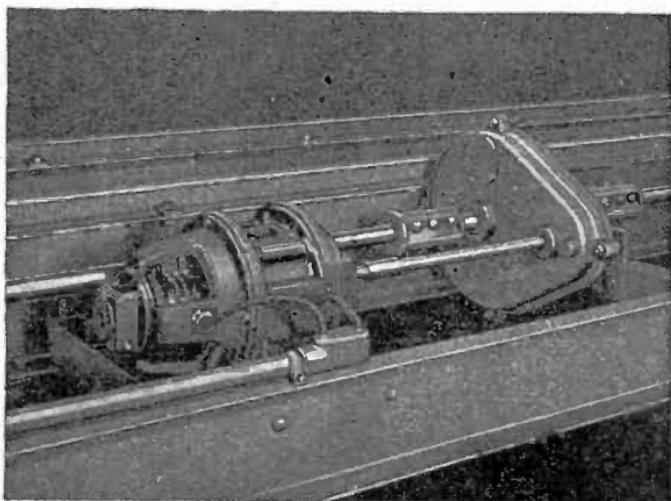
,887.—*Euclid crane construction 14.* Bridge drive mechanism used on I-beam girder cranes. A channel and plate structure, extending from one of the I-beam girders to the outrigger channel, forms a rigid and substantial support for the bridge drive motor. The driving pinion and gear are enclosed in oil tight housing, shown revolving in an oil bath.
